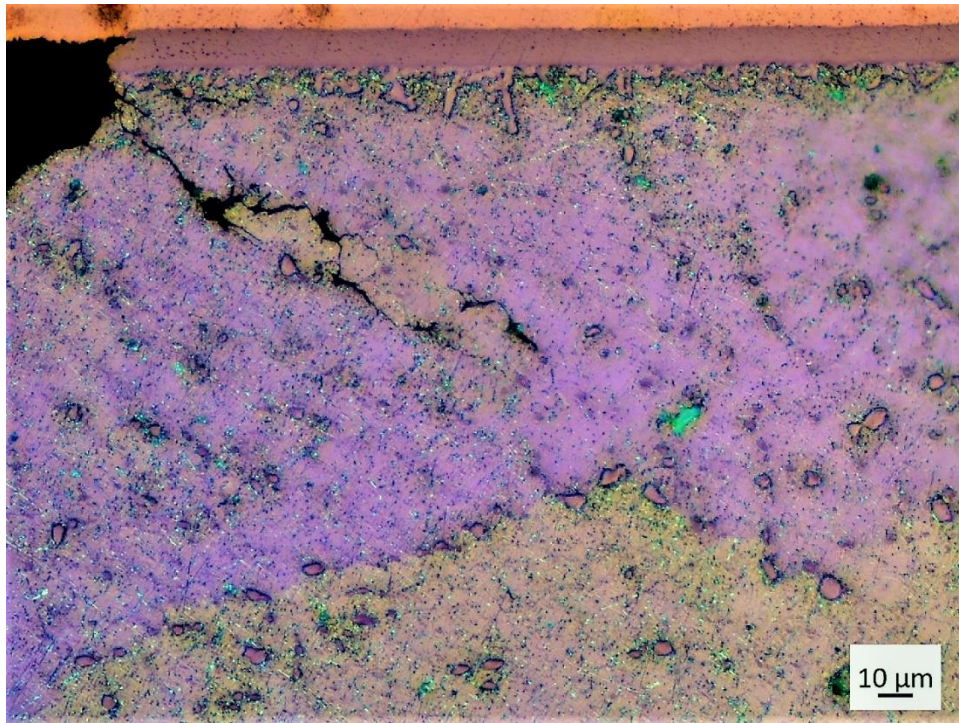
Shows the cross polarized image of the cracked solder joint. We can clearly see the 2 large grains and the crack propagating across the grains through the bulk solder. The highlighted section shows the crack propagation, refer Figure 5.8
